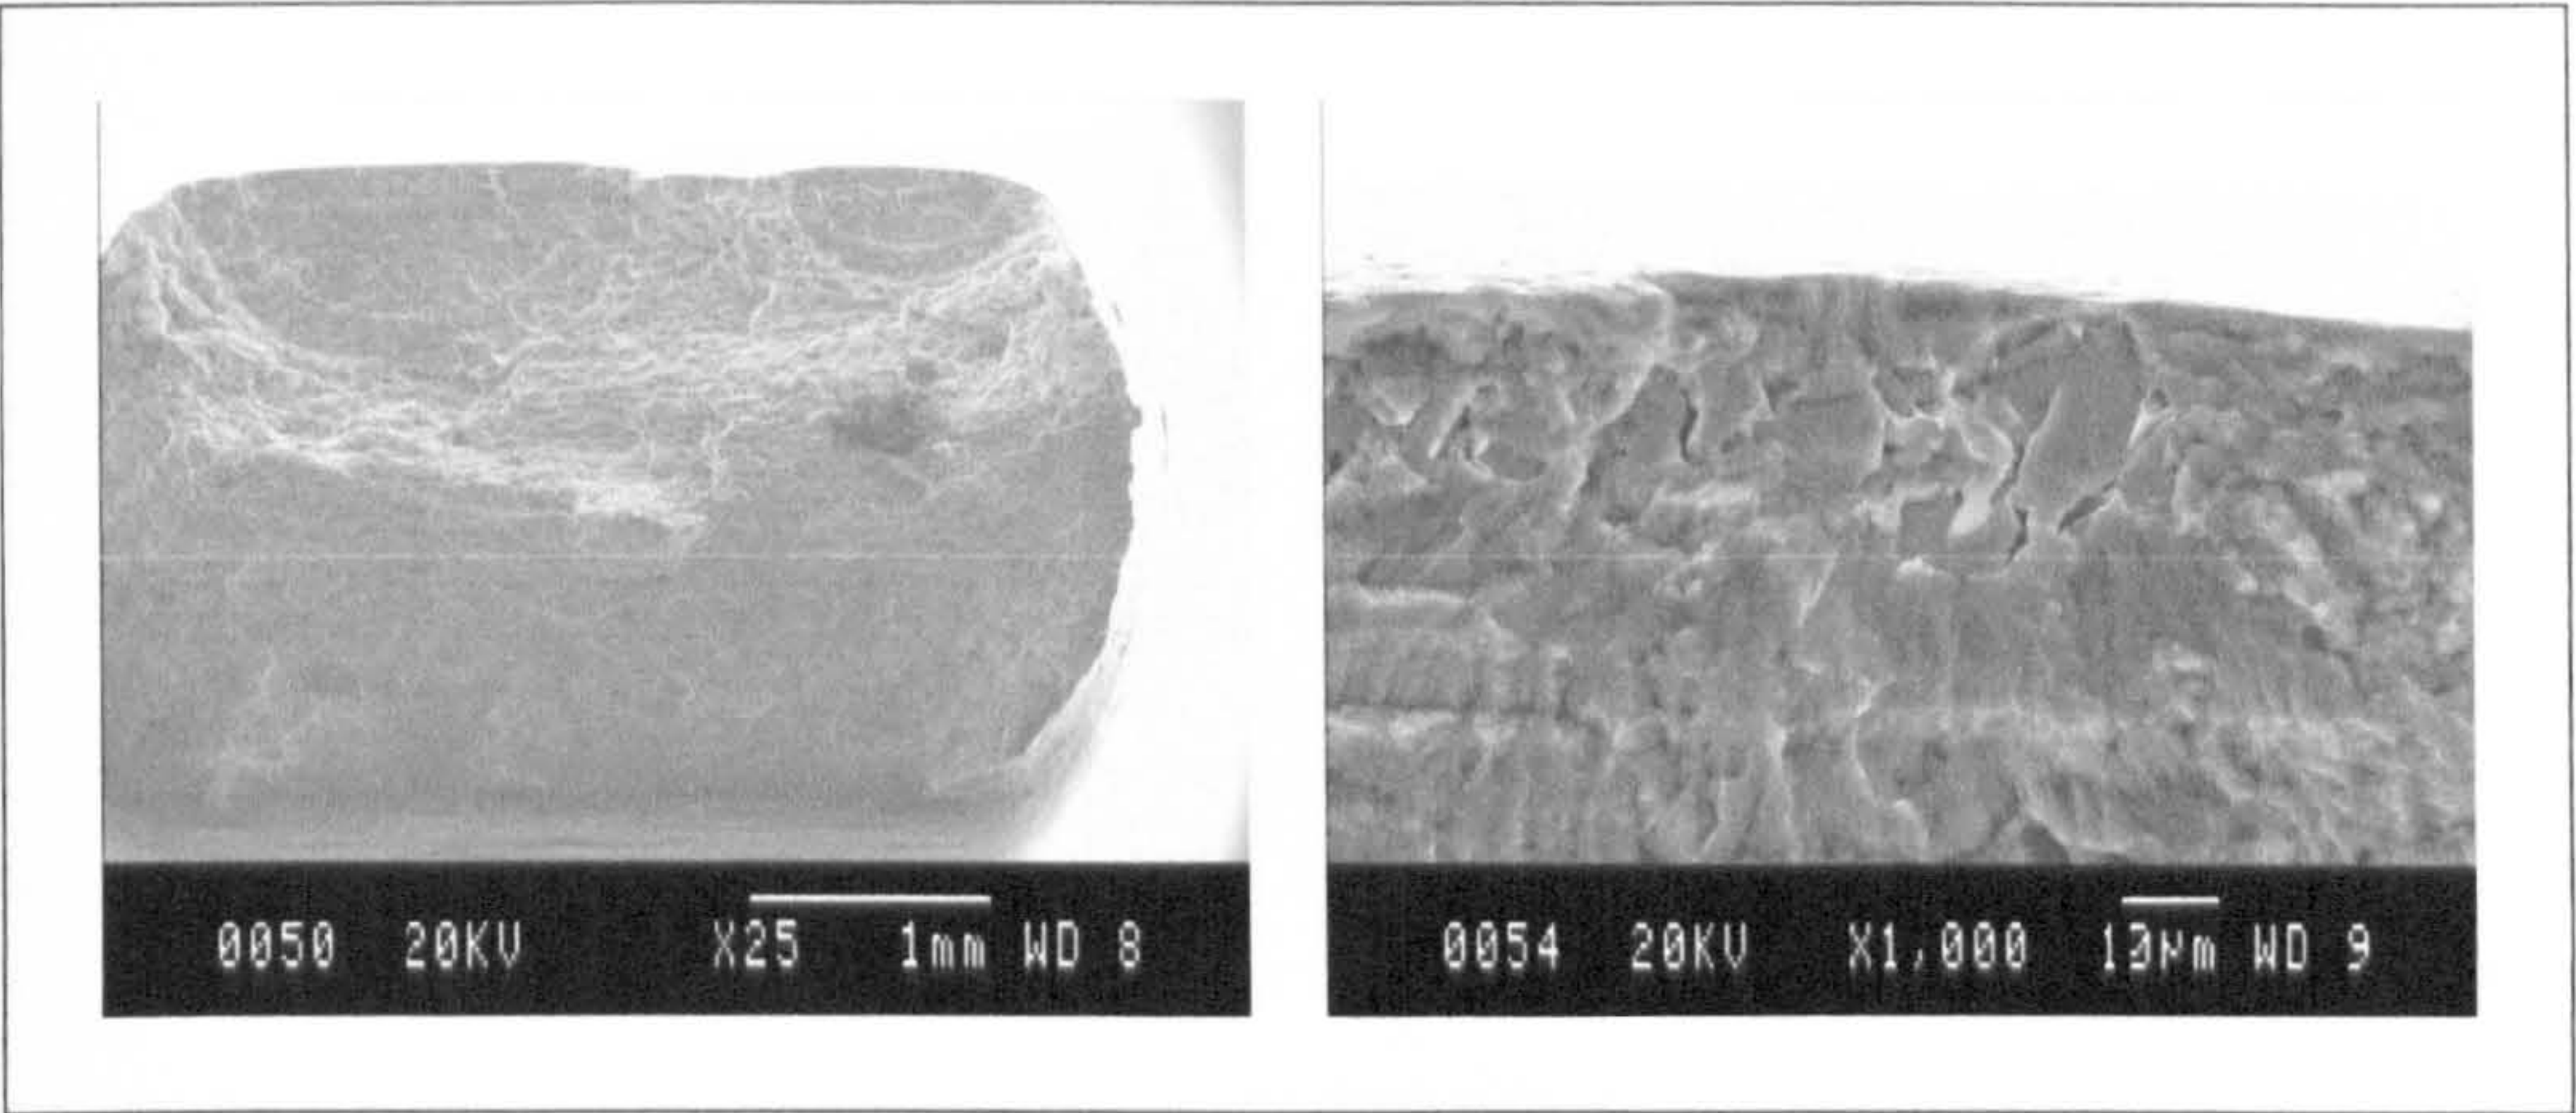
MIG LI SCG 4 weld toe fatigue crack fracture surfaces (left) and intermetallic induced initiation site (right).
